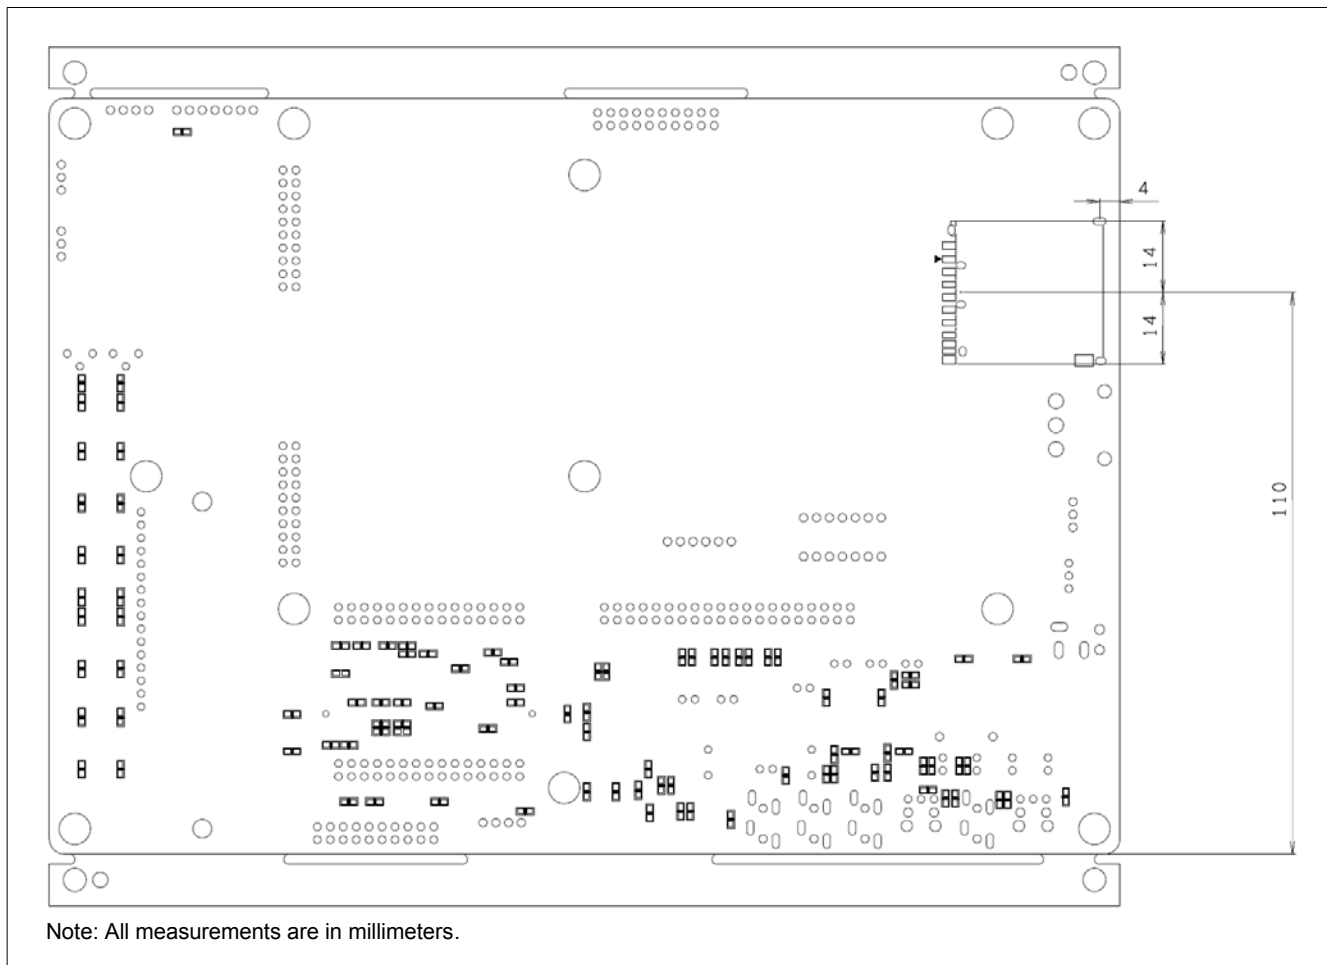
M3A-HS64G01 Dimensions (Transparent View of the Component Side)
